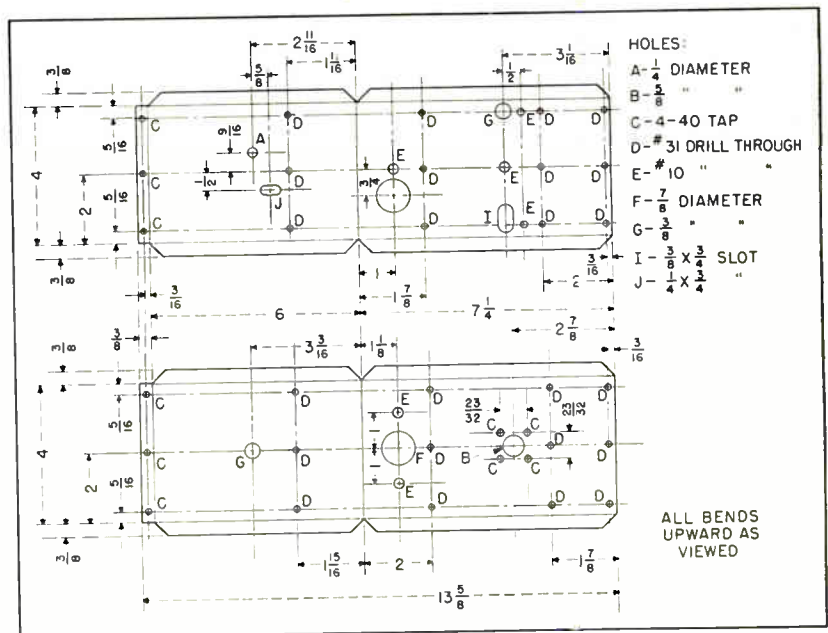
Layout of two L-shaped shields that form the metal cabinet. All dimensions are given in inches
